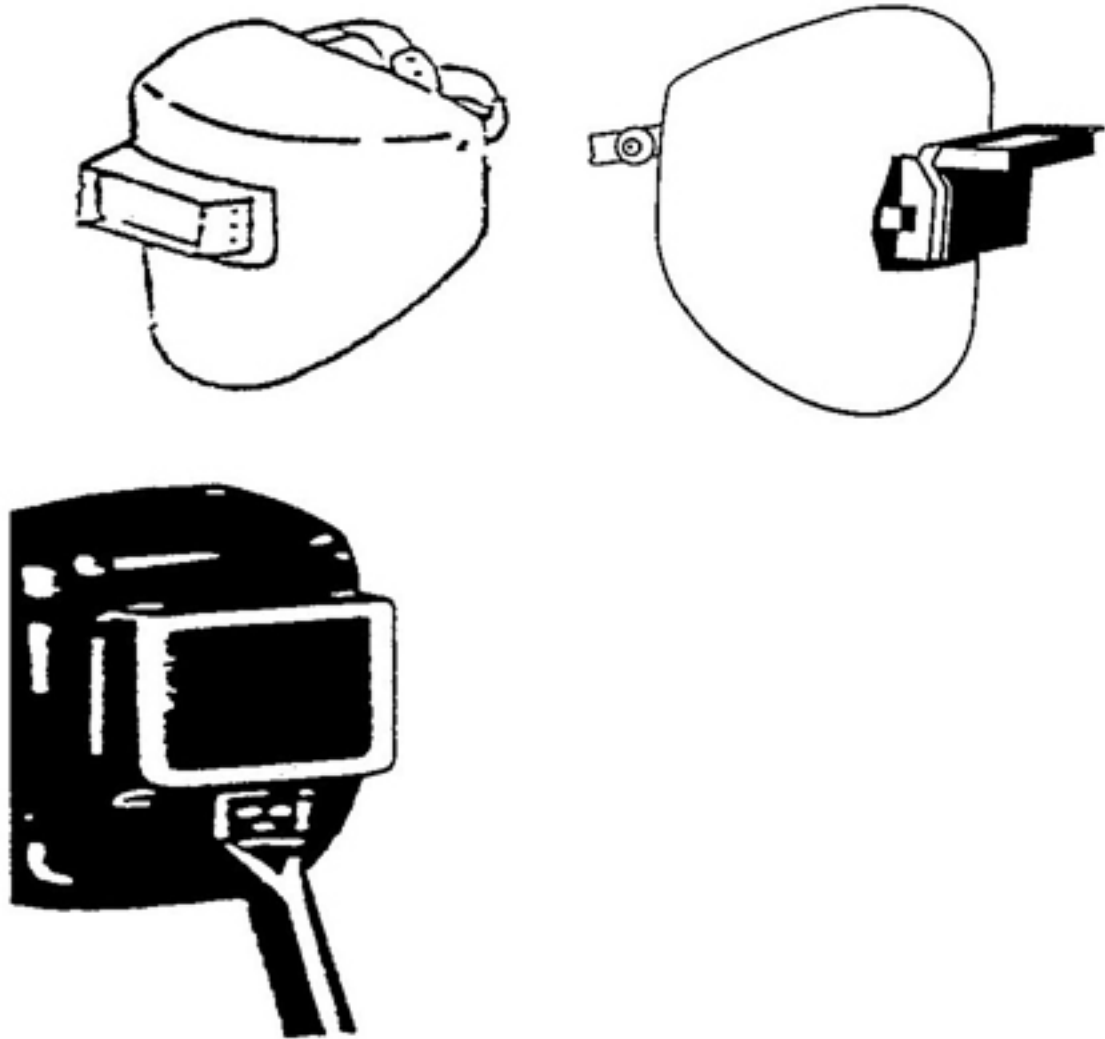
Welding helmets: helmet with stationary lens, lift-front helmet and handshield
